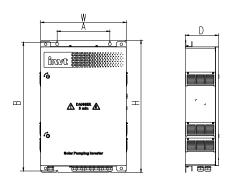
IP54 inverter dimensional drawing IP54 inverter dimensions (unit: mm)
